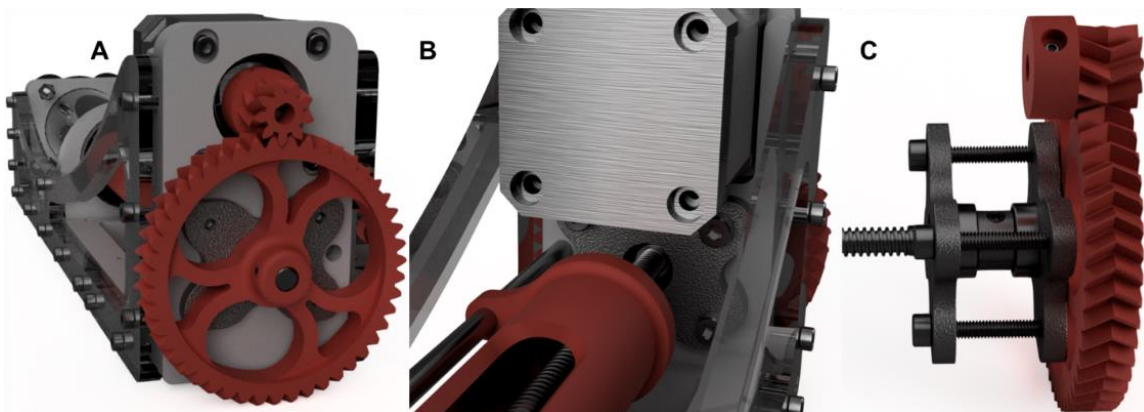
Exploded view of the feed system showing component positioning.
